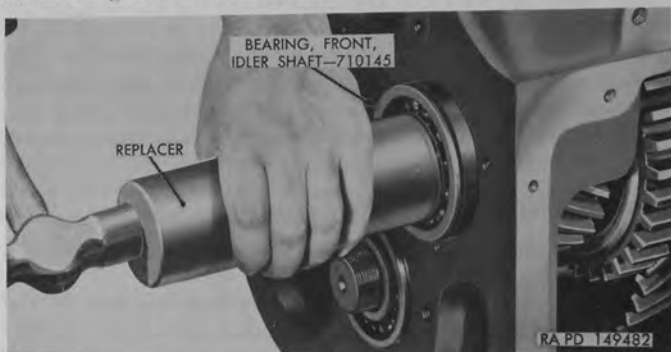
Use of replacer 41-R-2390-415 for installing idler shaft front bearing.
